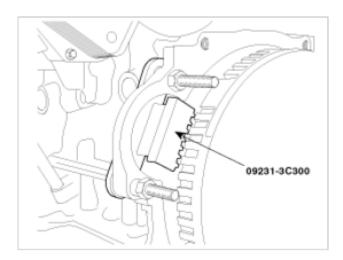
Installing Crankshaft Damper Pulley Using SST (09231-3C300)
